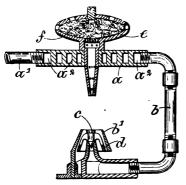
The Liquid Fuel Company steam omnibus. Vertical section of burner.
